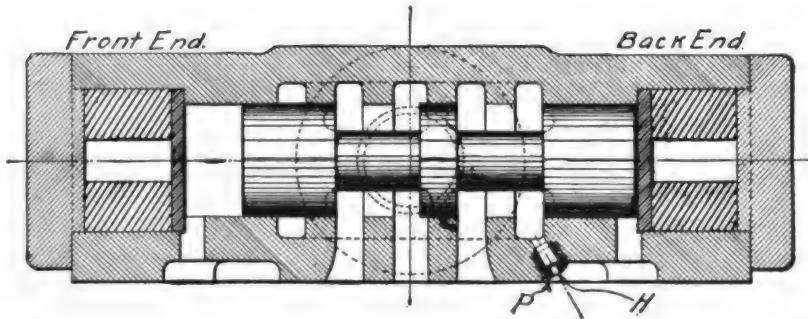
Spool-Valve and Chest. "Sergeant" Rock Drill.
